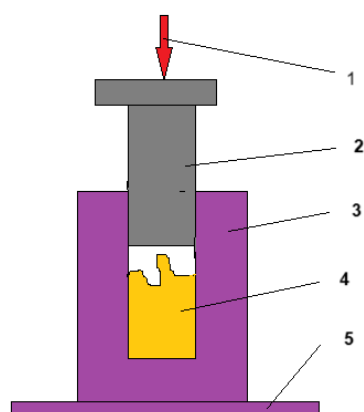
Scheme of a metal mold used in the compression of briquettes. 1—rod; 2—cylindrical shape of the piston; 3—body; 4—filling of the cylindrical space with the studied sawdust composition; 5—device base.
